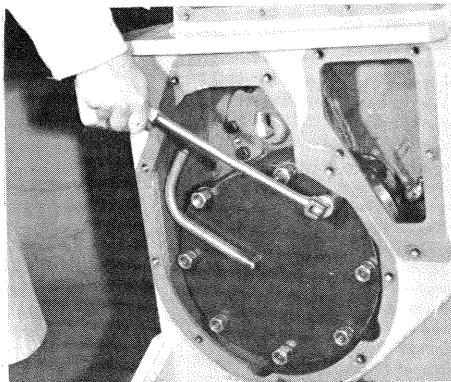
REMOVAL AND DISASSEMBLY OF PTO SHAFT ASSEMBLY
